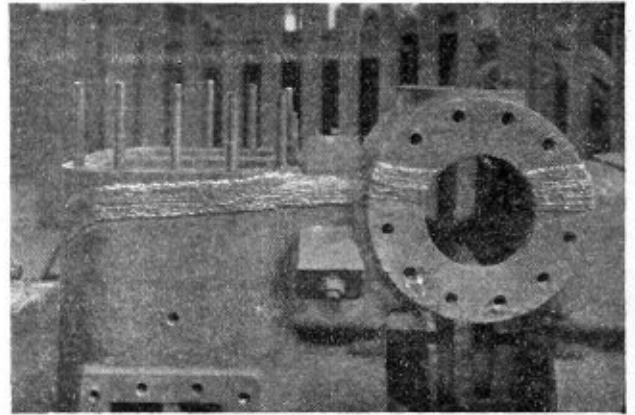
Appearance of the Weld After Welding With Bare Arc
